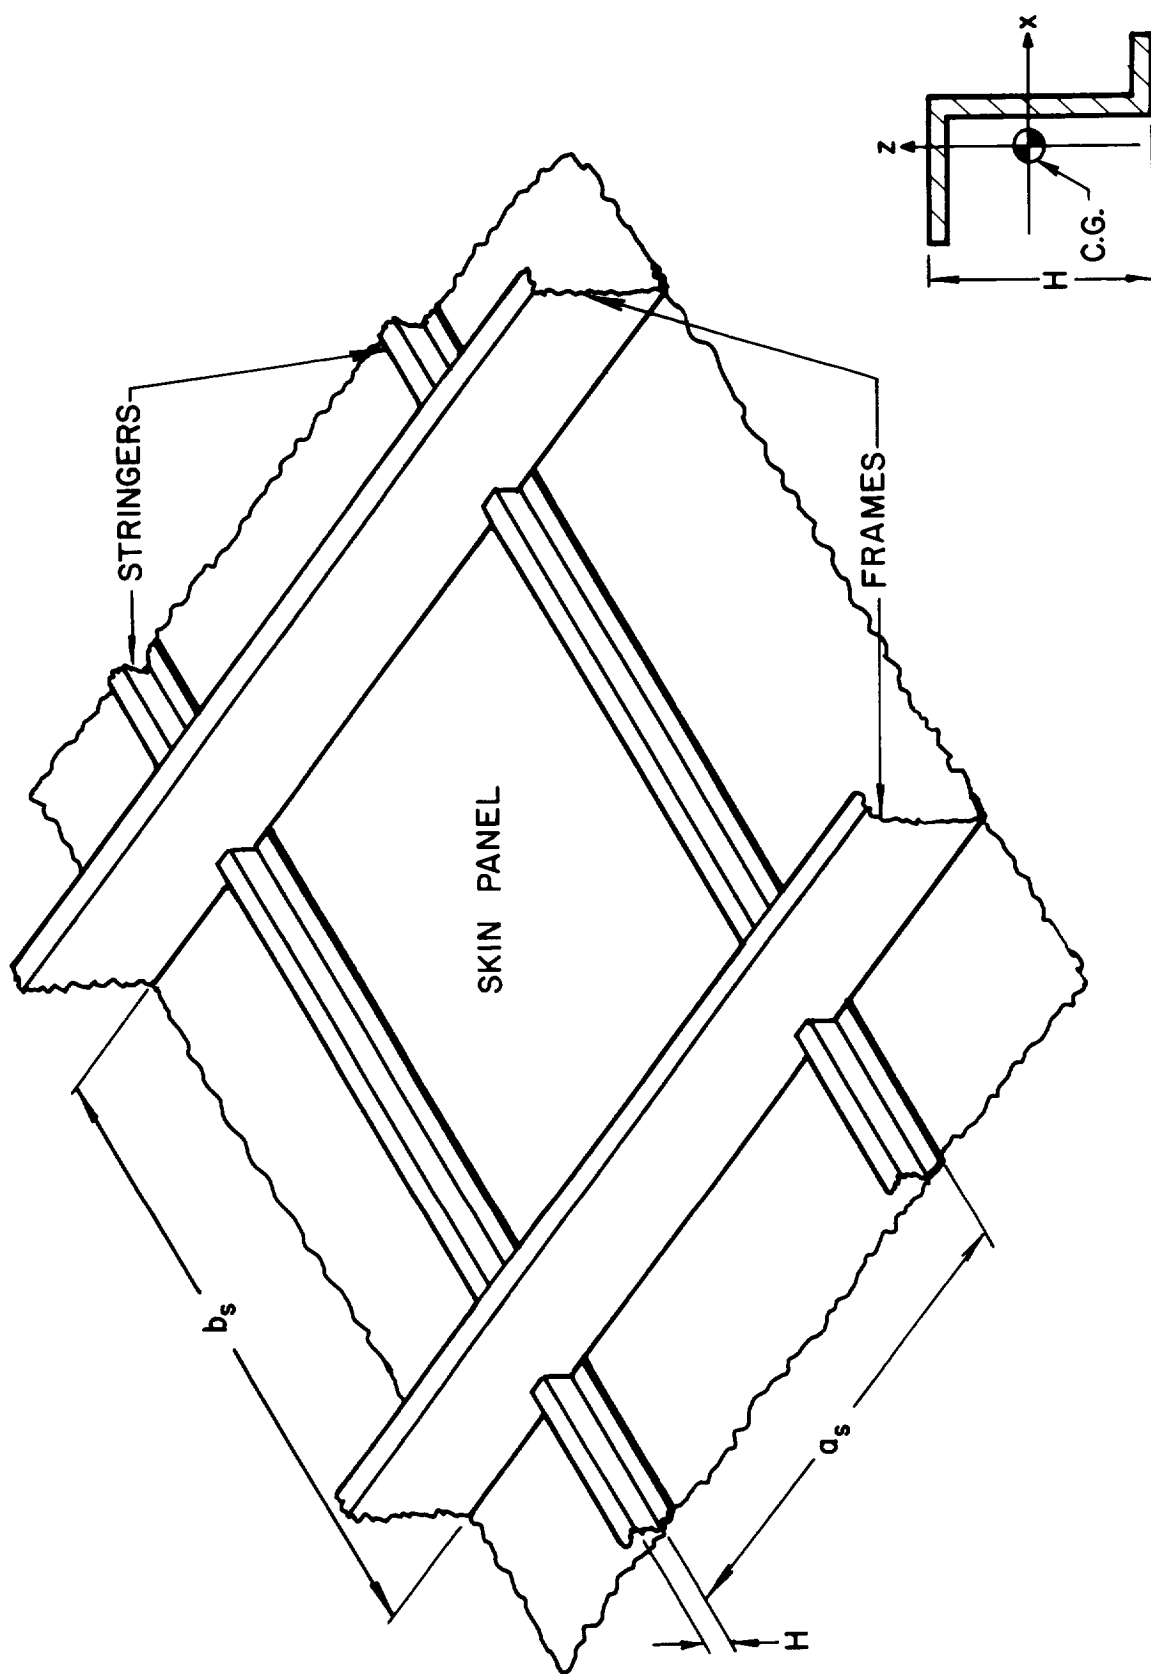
TYPICAL BAY OF SKIN-STRINGER STRUCTURE, AND TYPICAL STRINGER CROSS-SECTION.
